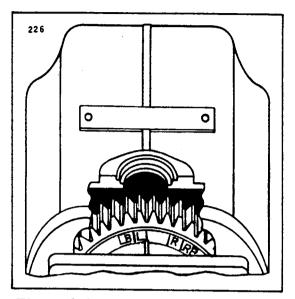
Aligning Timing Marks Single Contact Assembly Magneto
